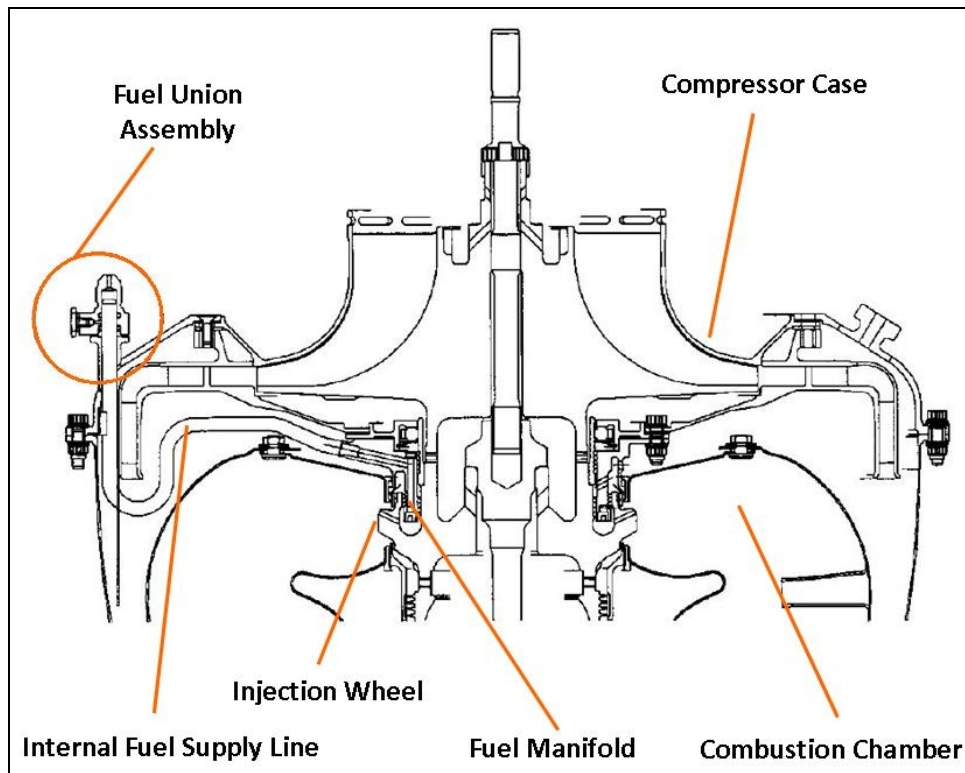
Cross-section view of fuel supply routing and manifold on engine compressor case.
